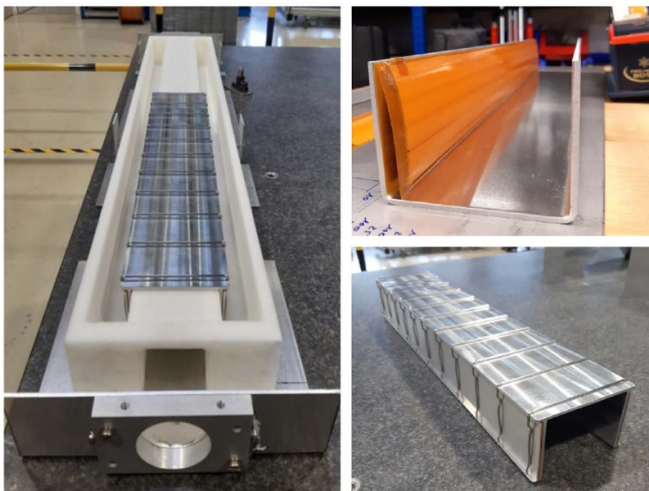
Left: experimental assembly. The support plate at the bottom bottom holds the iron bars, the foam box and the stainless steel tube which is blocked by means of two supports at the plate ends. The holder is settled inside the foam box. Right, top: first HTS holder prototype, obtained by bending an aluminum plate and fixing the screen using adhesive tape. Right, bottom: second HTS holder prototype, obtained by machining an aluminum block and fixing the tapes using aluminum counter-plates and clips.
